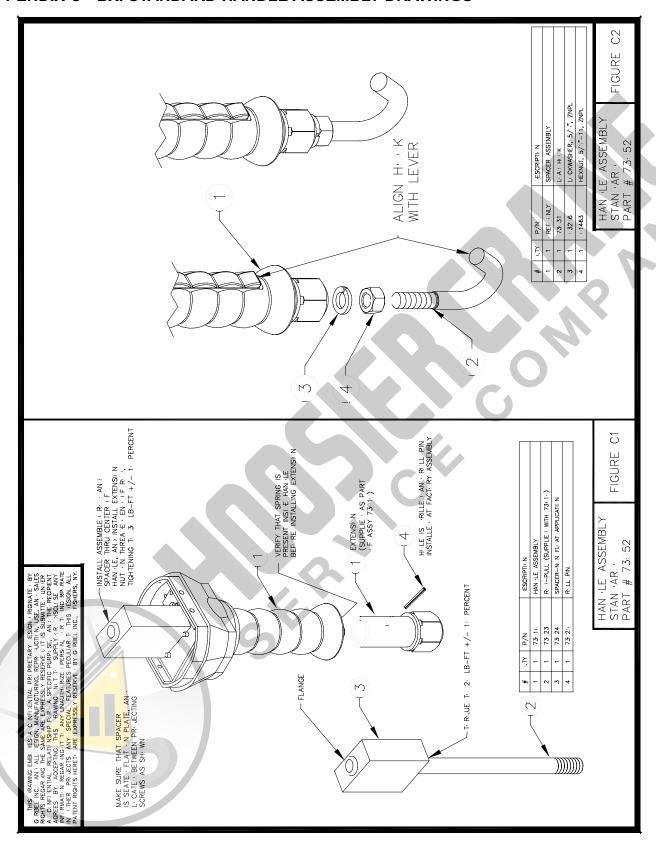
(bottom) & Figure C2 (top). Standard Handle Assembly.
